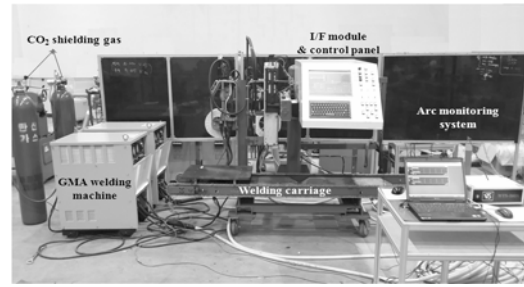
Experimental setup for tandem GMA welding process
